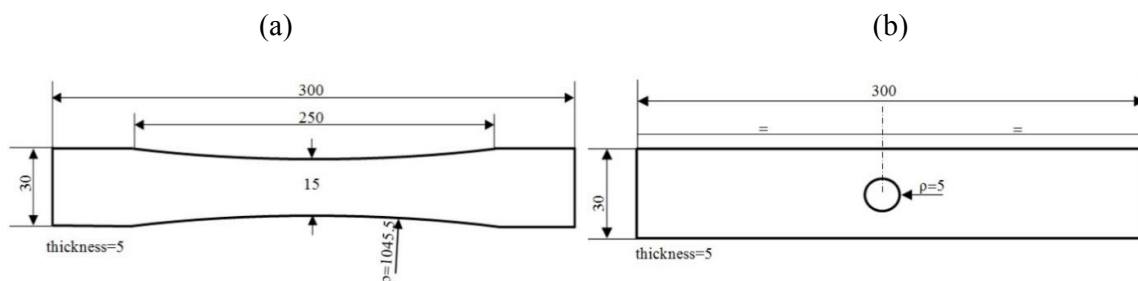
(a) hour-glass shaped specimen; (b) plate with central hole; all dimensions in mm
